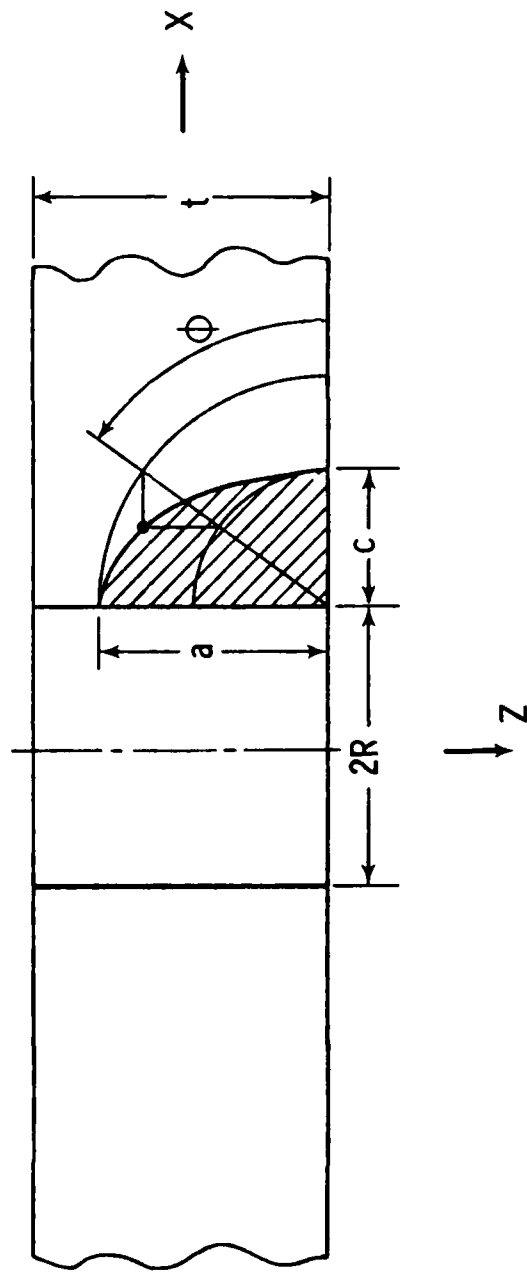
Quarter-elliptical corner crack located perpendicular to edge of hole in a wide plate.
